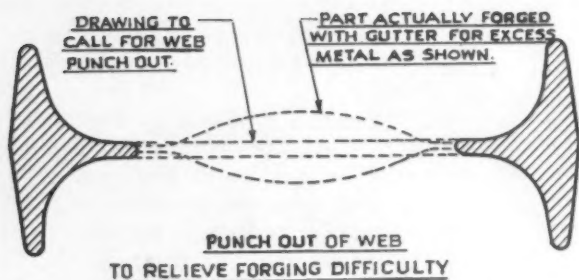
By punching out thin webs which tend to cool rapidly and become unforgeable before the heavier sections are fully formed, breakage of such dies can largely be eliminated.
